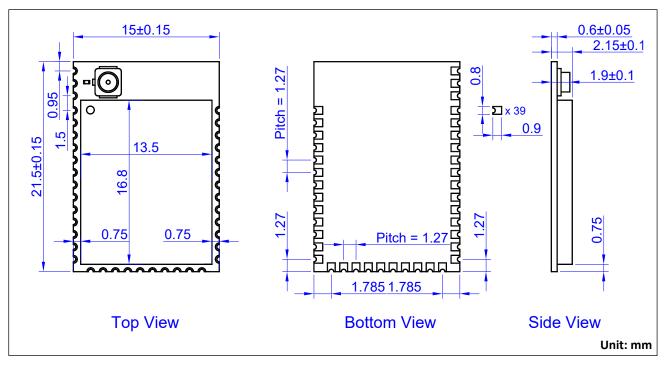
Mechanical Drawing of BDE-MP2652R7U and BDE-MP2652R7N
